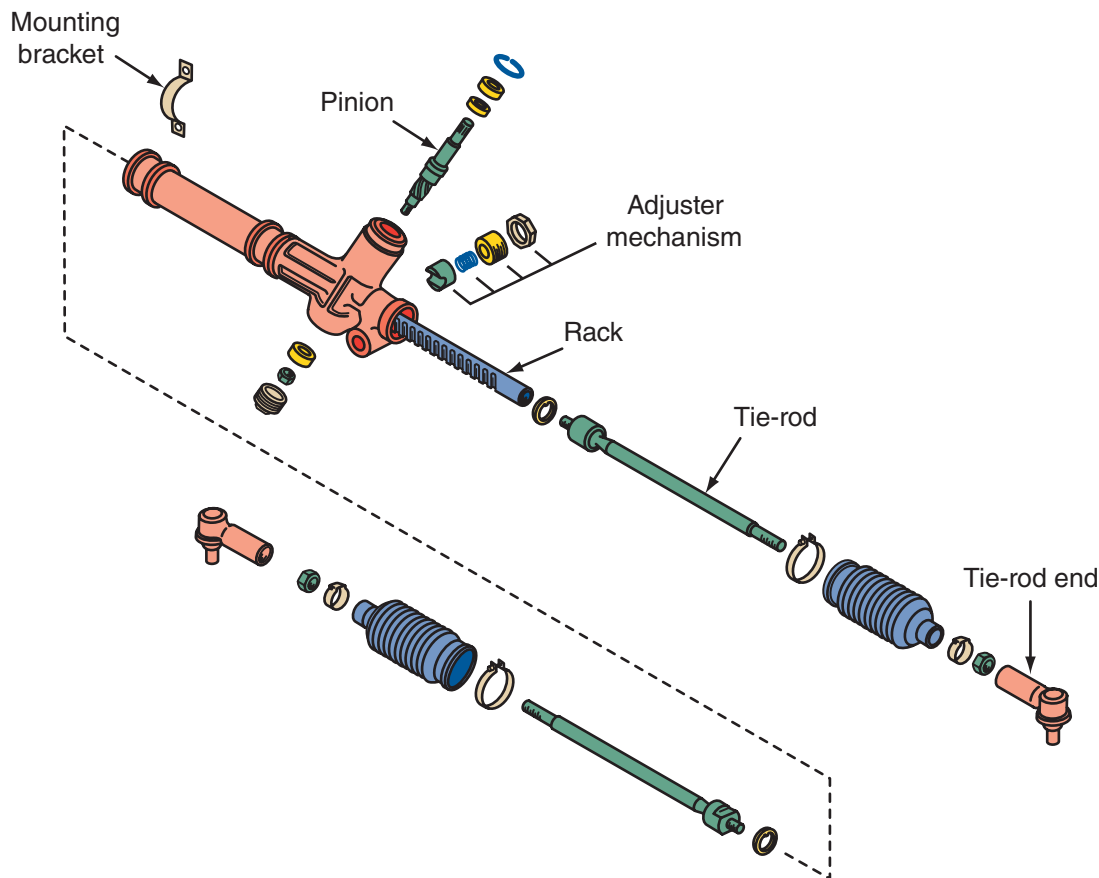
A disassembled view of a manual rack and pinion steering gear.
